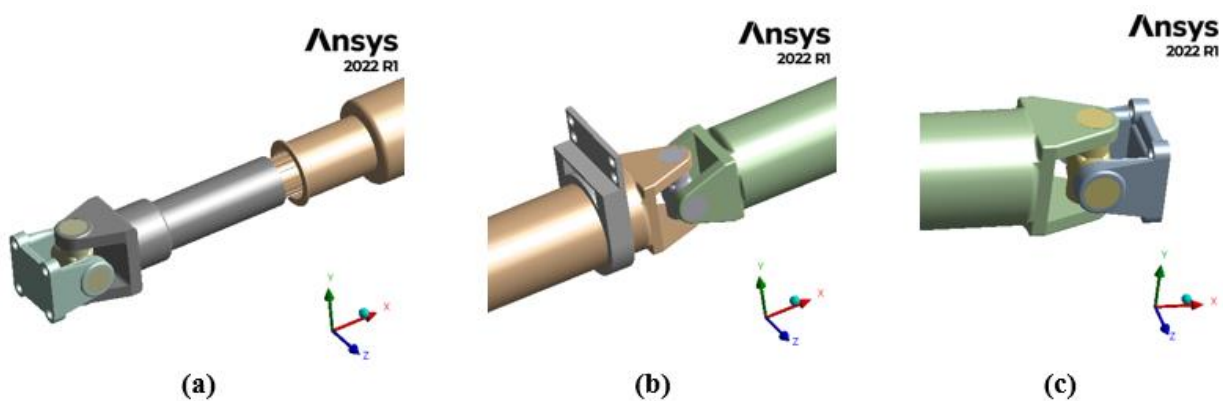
(a) Slip yoke and front flange, (b) Center bearing and middle universal joint and (c) rear universal joint
